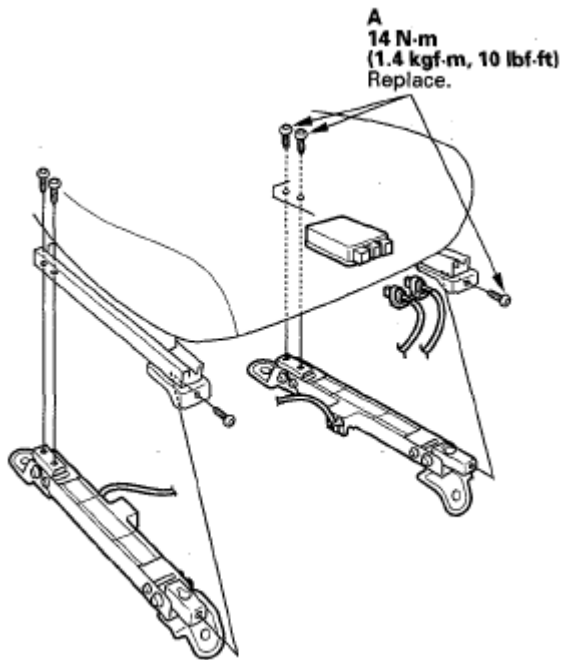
Identifying Seat Track Fasteners And Front Passenger's Weight Sensors With Torque Specifications
